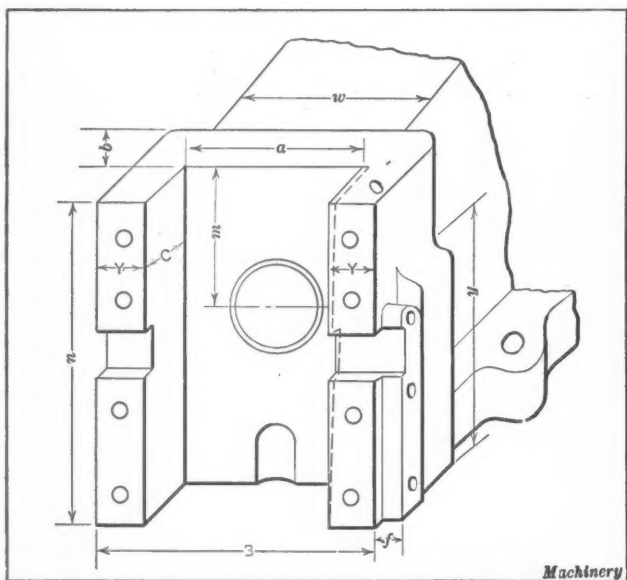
Detail of the Frame Head on a Punching and Shearing Machine
